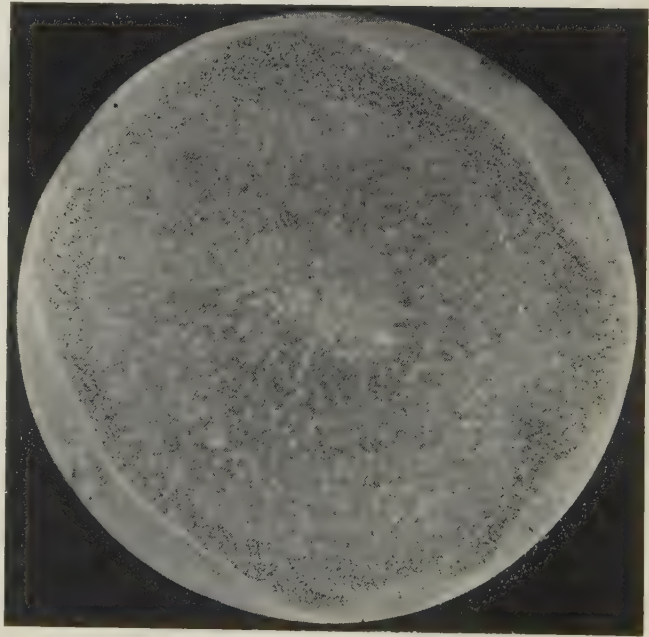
FIG. J.—Transverse Section through Billet Shown in Fig. H.
